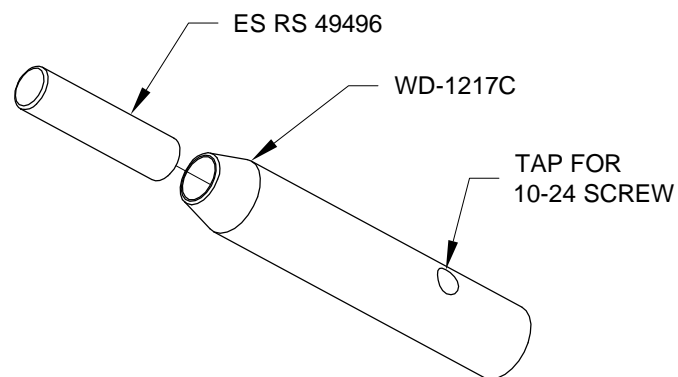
FUSELAGE PIN STOPPER ASSEMBLY
